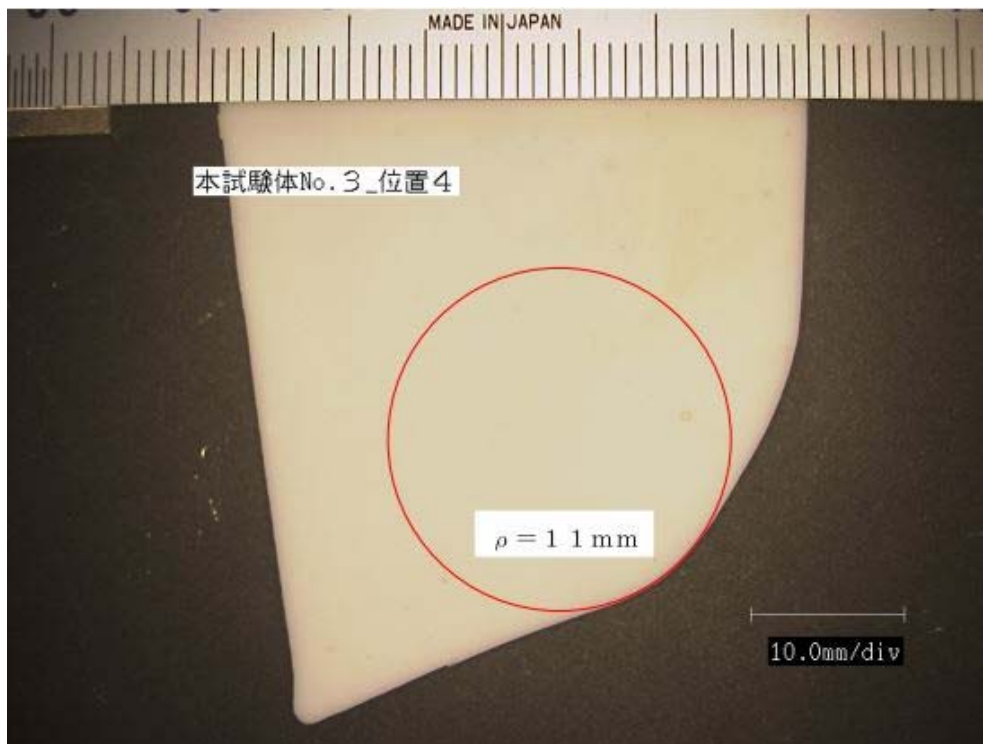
Weld profiles of the saddle part in specimen3 (T3-2), $\rho=11\text{mm}$.
